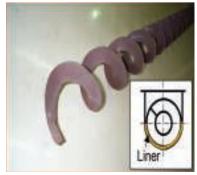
The flights on a shaftless, screw-type conveyor have robust construction, which allows them to resist damage by torsional wind-up
